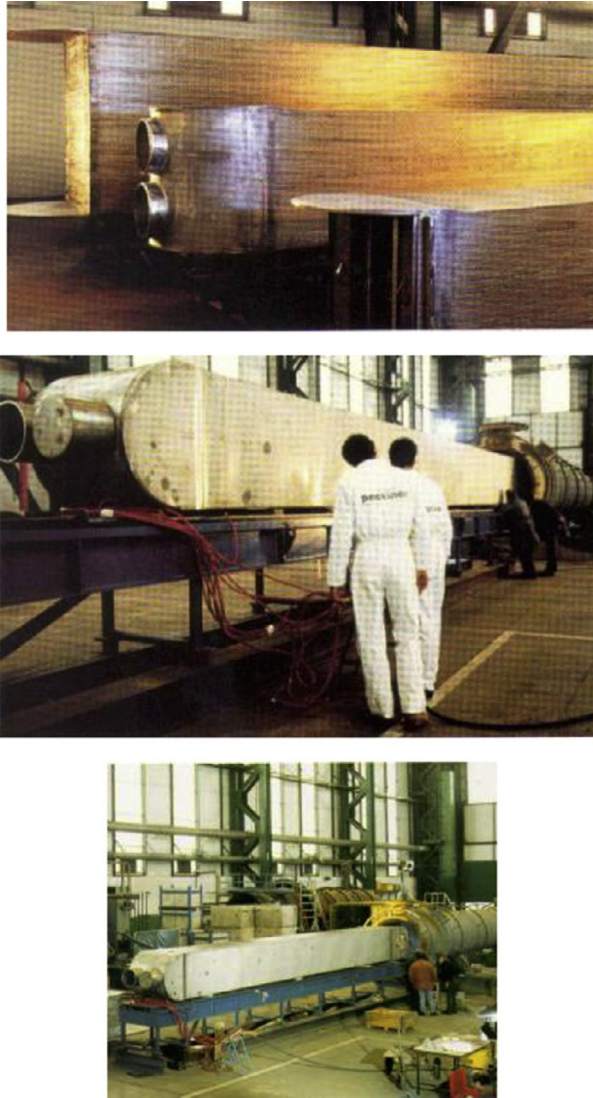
Welded plate-and-frame exchangers.
